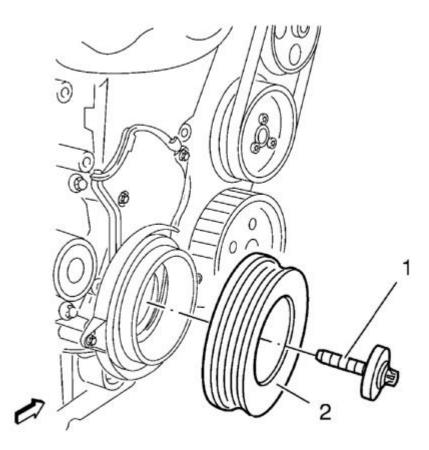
Crankshaft Balancer And Bolt Courtesy of GENERAL MOTORS CORP.
